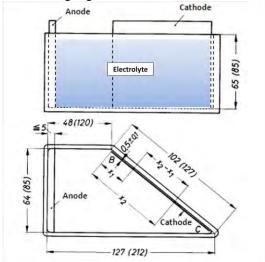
250 ml Hull cell top and side view with dimensions in mm (between parentheses: 11-Hull cell) [9]
